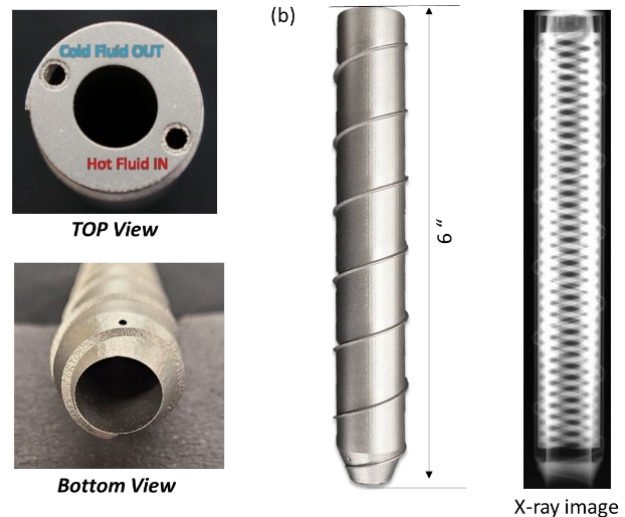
3D printed thermal corer with embedded mini-channels (a) top and bottom views (b) front view (c) x-ray shows the mini-channels
